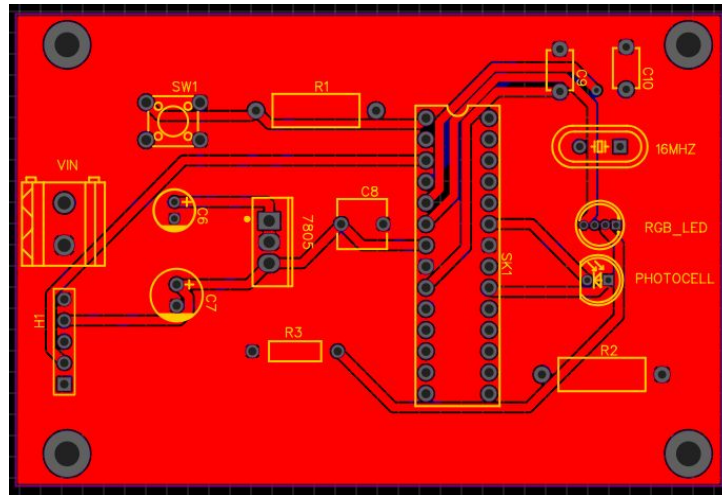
PCB layout of color sensing PCB designed for ATmega328P-PU microcontroller
